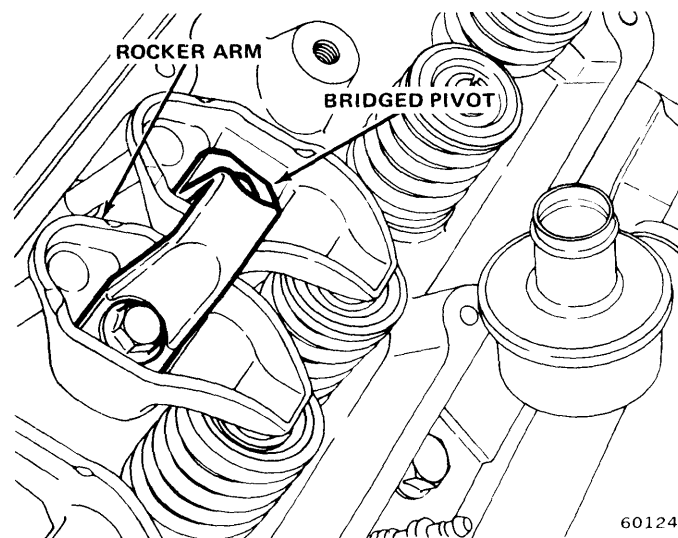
B-9 Rocker Arm Assembly—V-8 Engine
